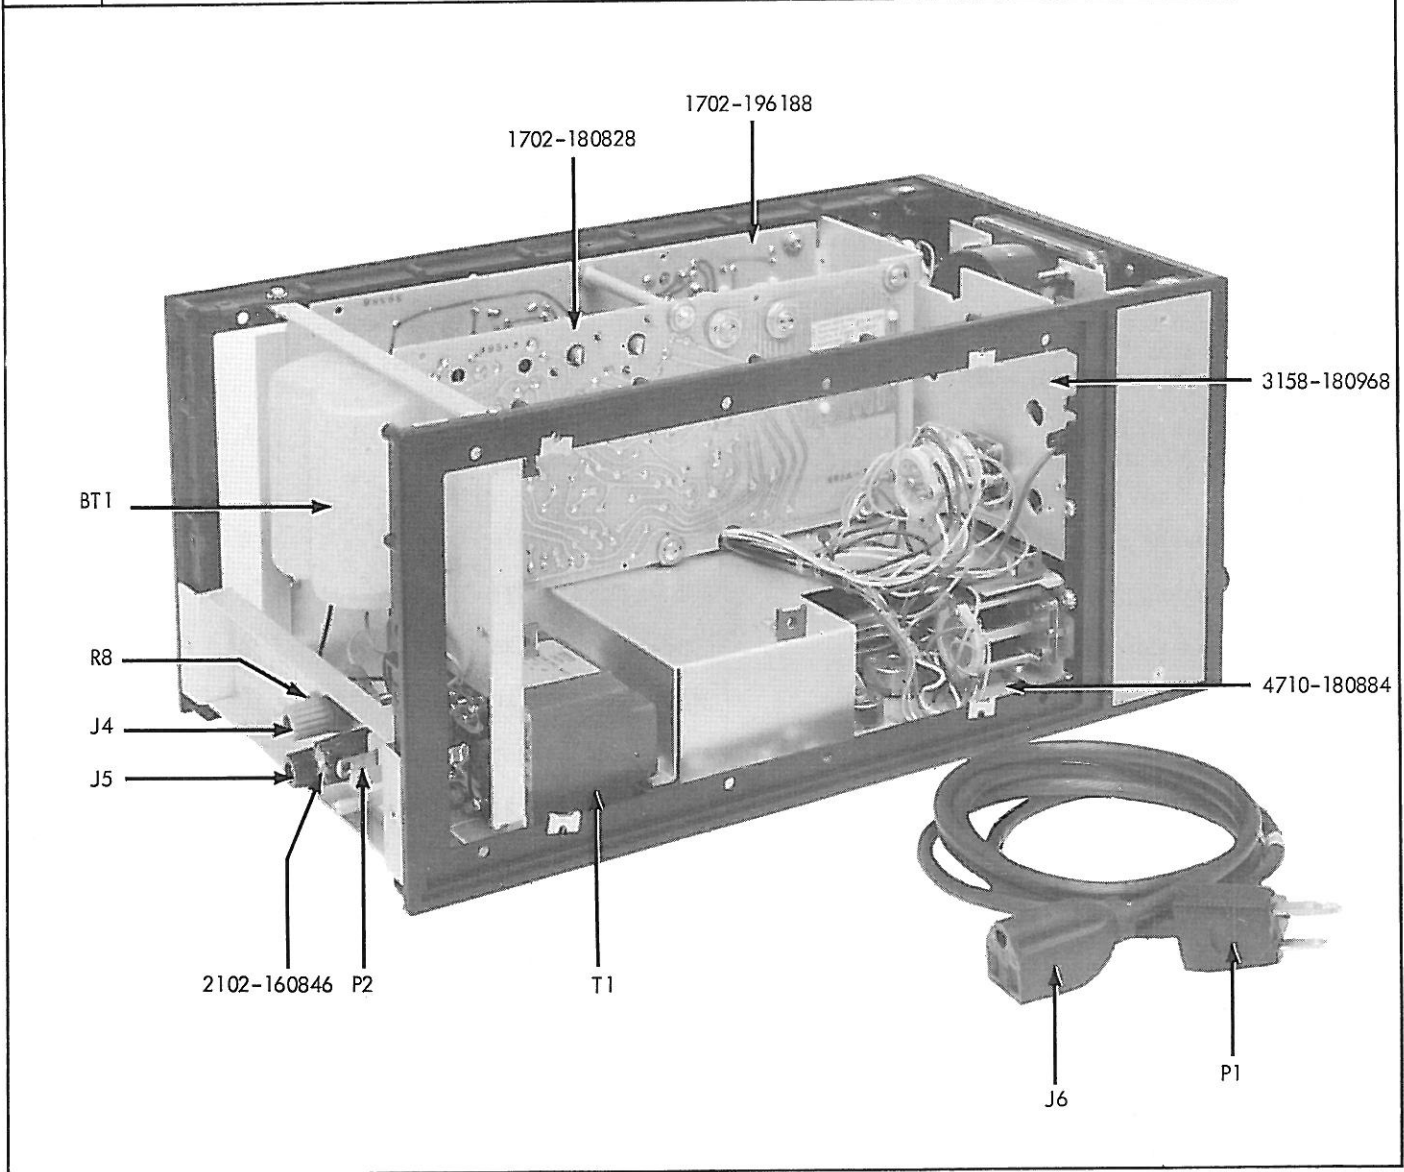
FINAL ASSEMBLY (Sheet 1 of 2)
